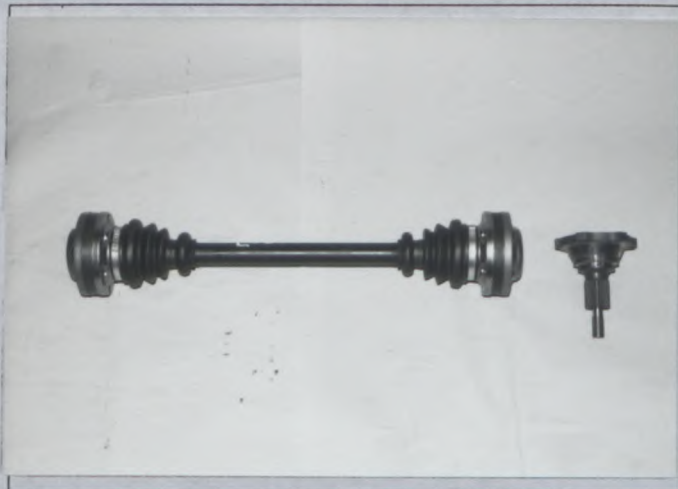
REINFORCED DRIVE SHAFT, REAR, TYPE B
